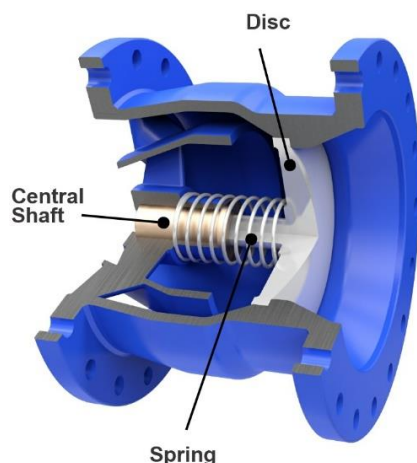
Central Shaft Nozzle Check Valve indicating that the design has only one moving part making the design uncomplicated and maintenance free.
